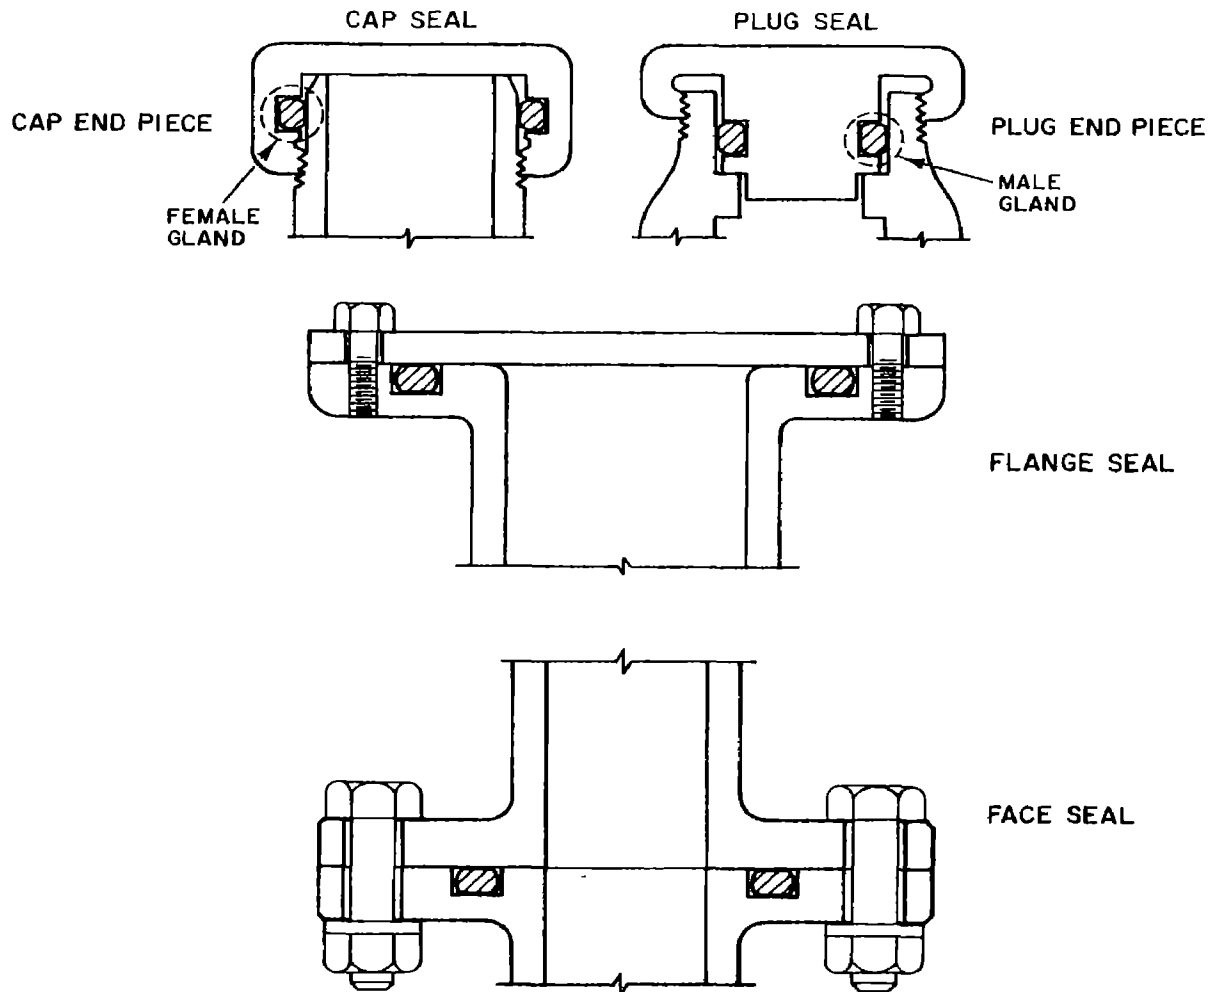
Static-type seals (cap, plug, flange, and face). Note that gap in flange and face seals can be essentially zero, permitting sealing of very high pressures.
